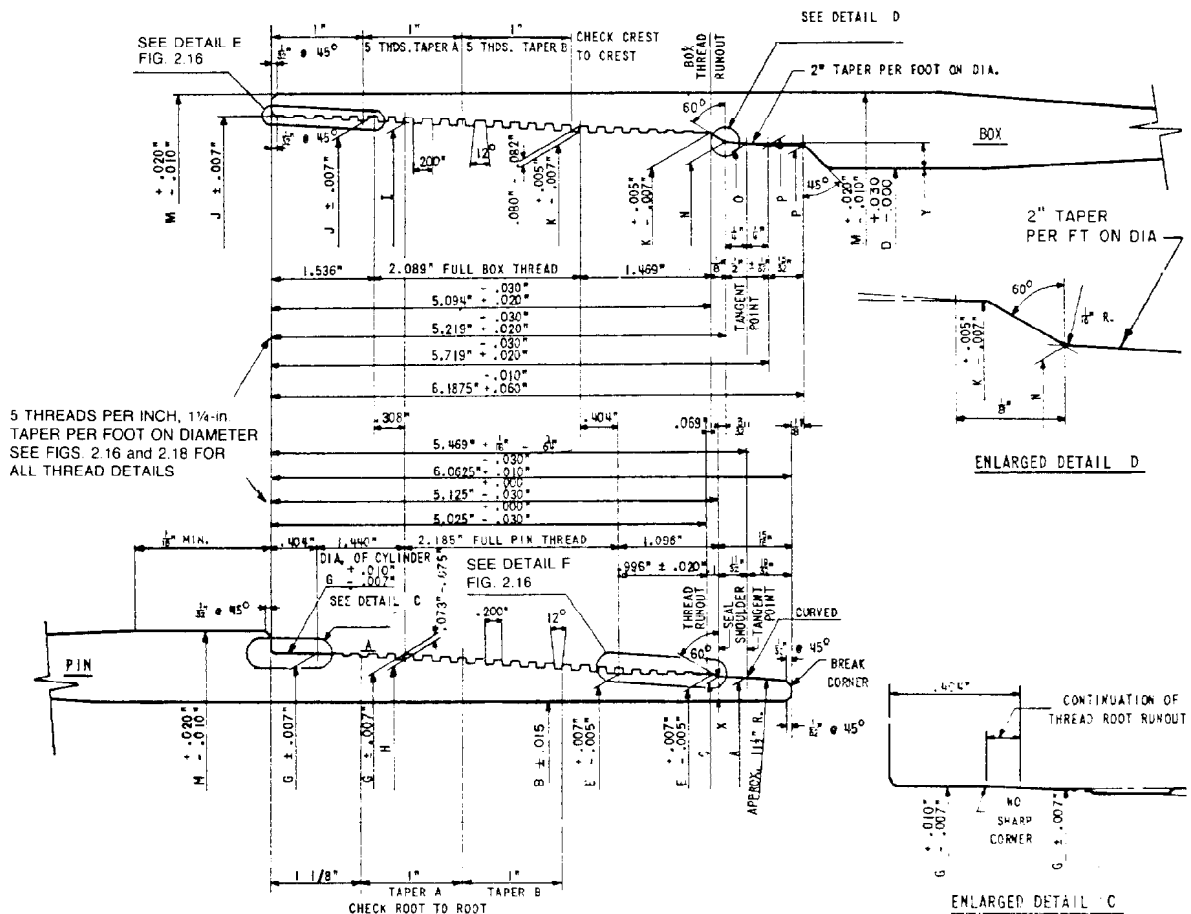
Machining details, extreme-line casing joint sizes 8 $\frac{5}{8}$ through 10 $\frac{3}{4}$ in. (see Table 2.53).
